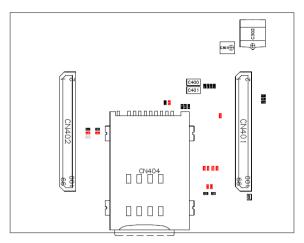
AirPrime SL501x Socket Board (Bottom View)
